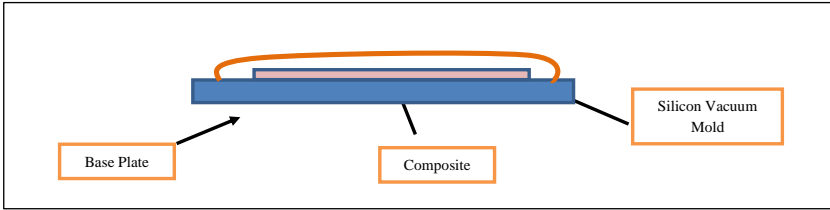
Schematic of vacuum bagging setup for composite fabrication
